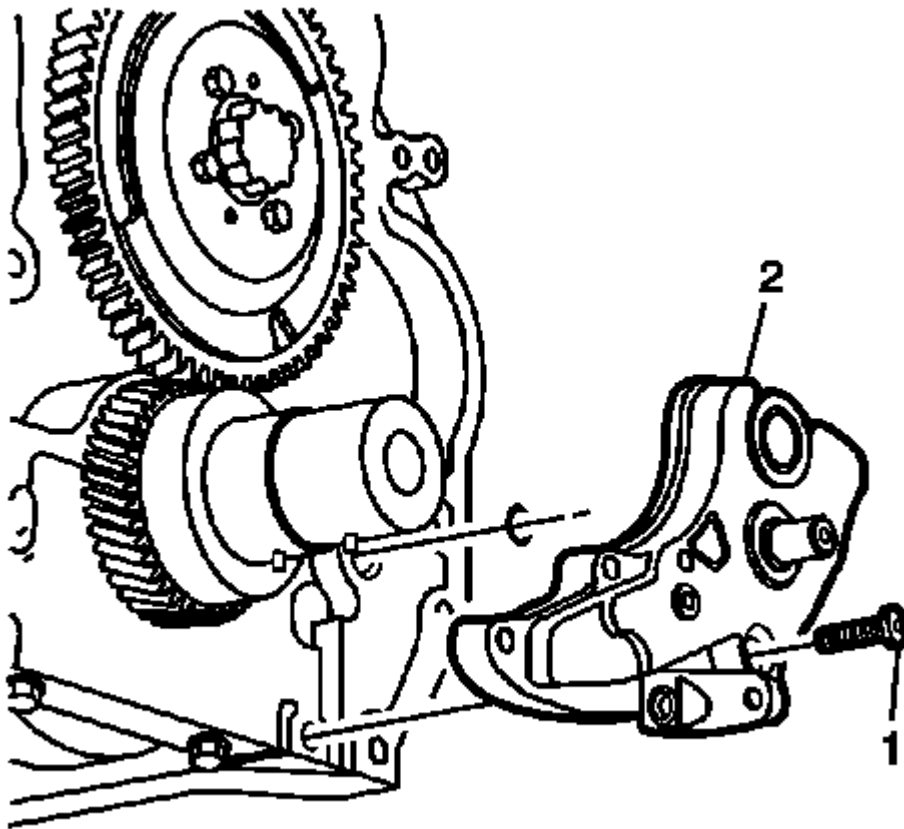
View Of Oil Pump, O-Ring Seal & Bolt
